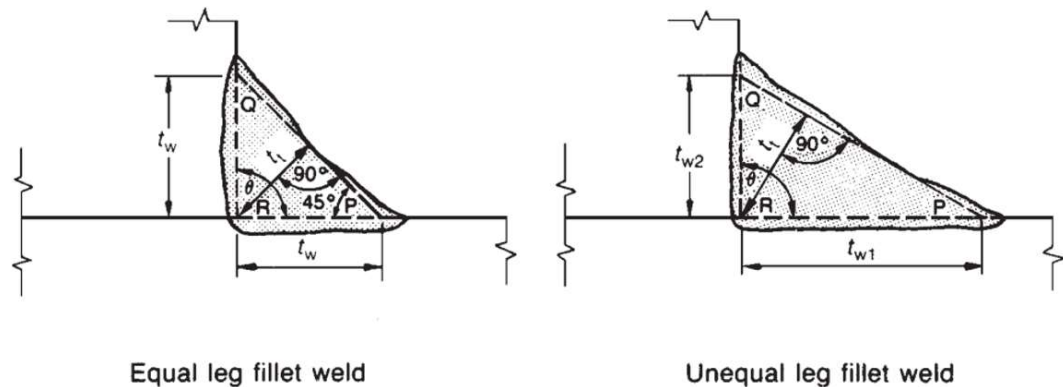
Equal leg fillet weld (left) and Unequal leg fillet weld (right from) in NZS3404:1997
